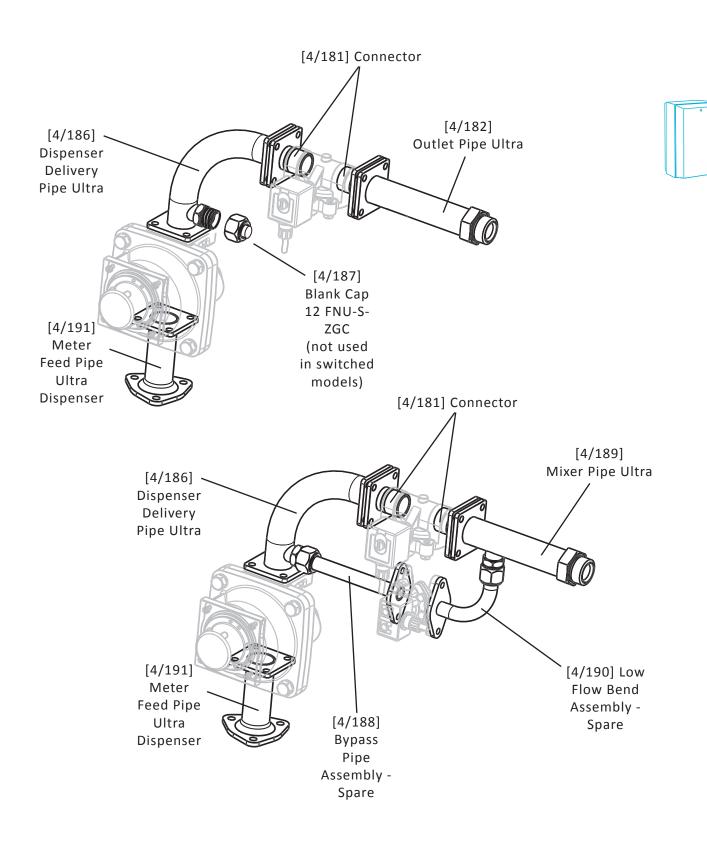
Hydraulic Pipework - UHF dispensers - arrangement (filters not shown)
